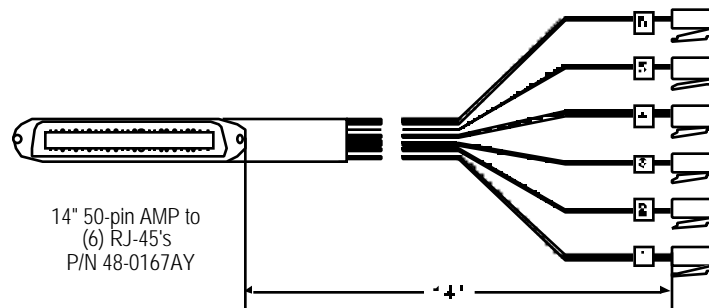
RJ-45 to 50-pin AMP Test Cable
